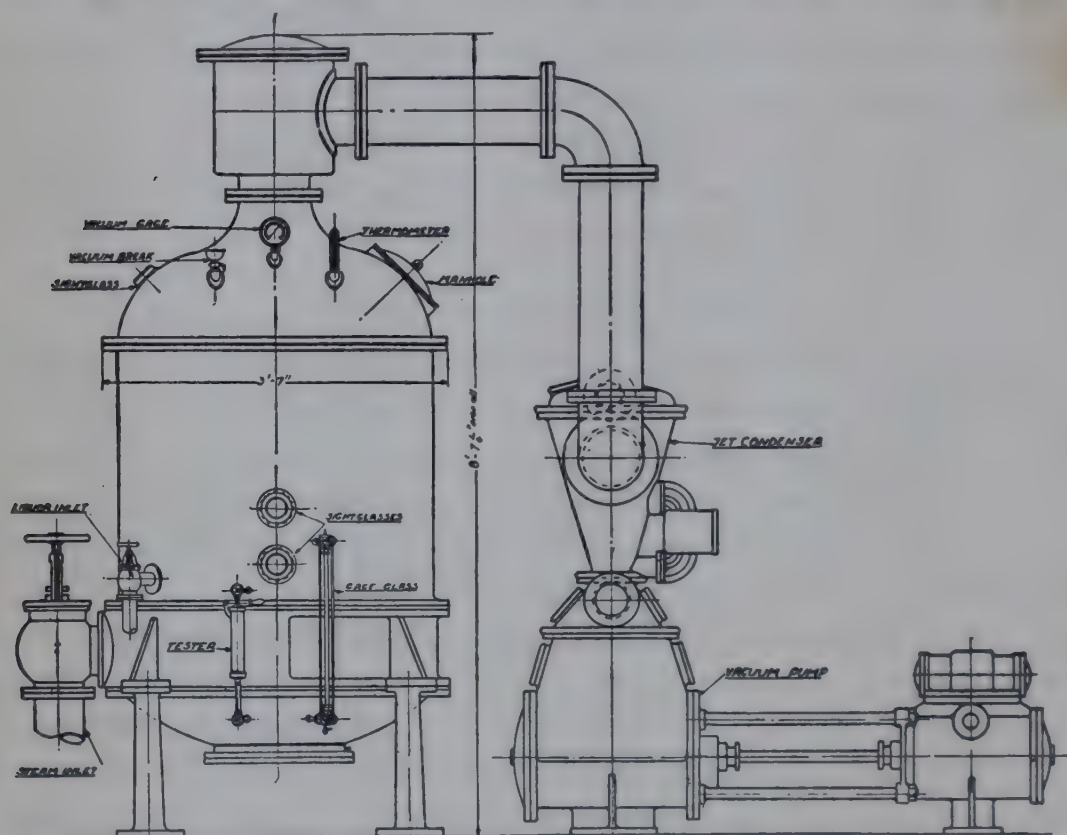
Sketch of vacuum pan with jet condenser and wet vacuum pump. (Courtesy The Oscar Krenz Co.)
